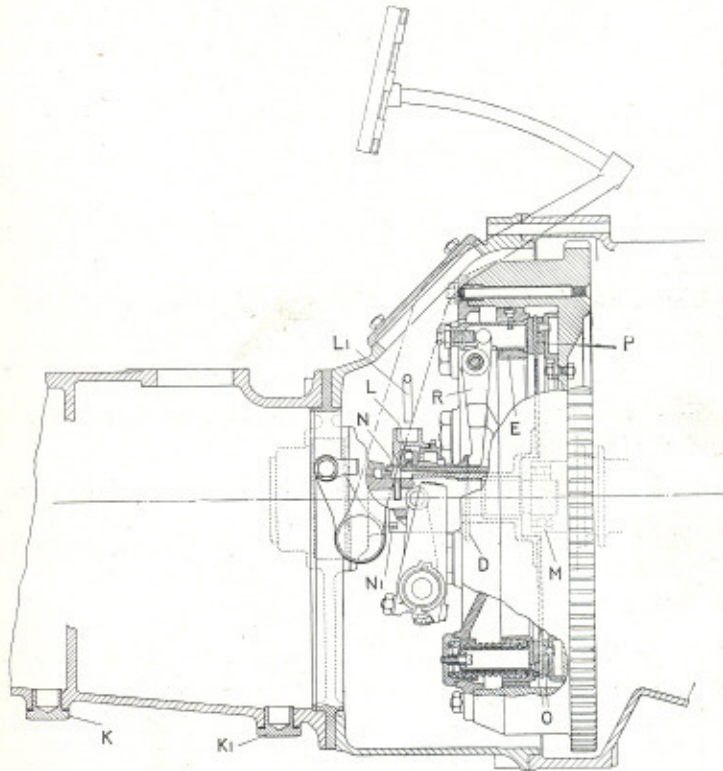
PART SECTIONAL VIEW OF CLUTCH.
